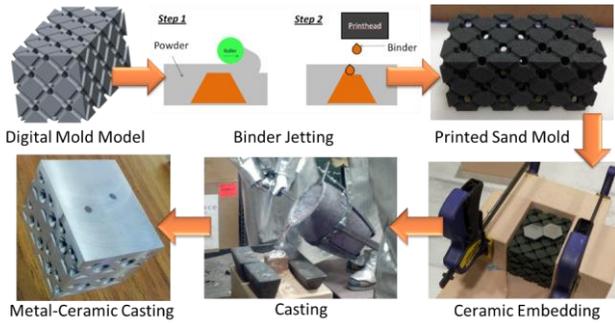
Overall process chain for producing metal-ceramic/hard metal composite castings using 3D printed sand molds and cores.
